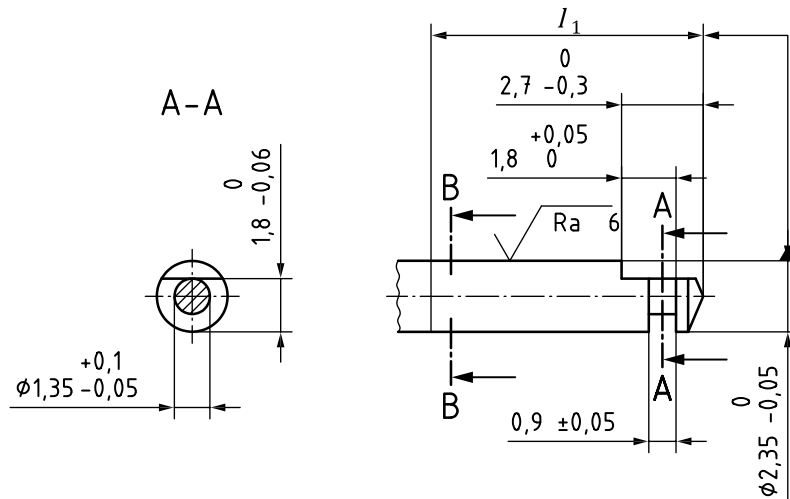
Dimensions, tolerances and surface roughness for Type 1 plastic shank
